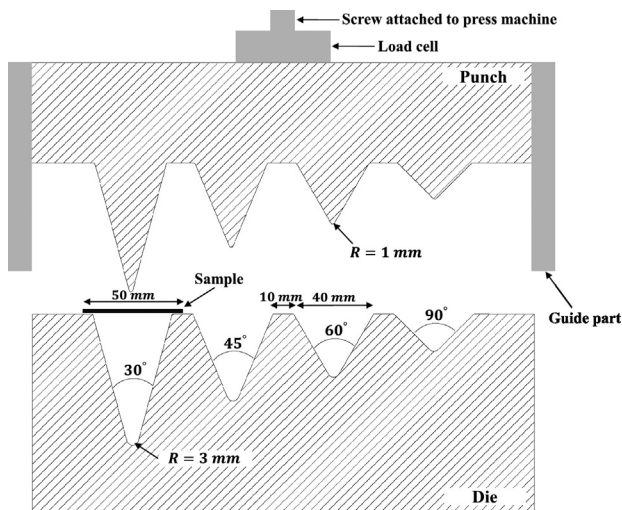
Schematic view of the experimental V-bending setup including cross sections of the V-bending die and punch with detailed dimensions.
